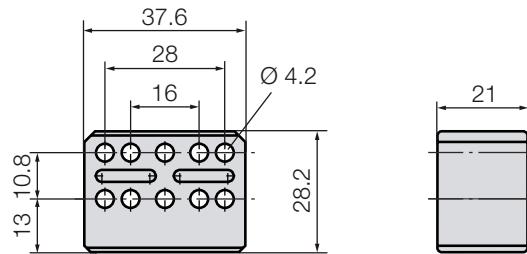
Installation dimensions for BTL6-A-3800-2
